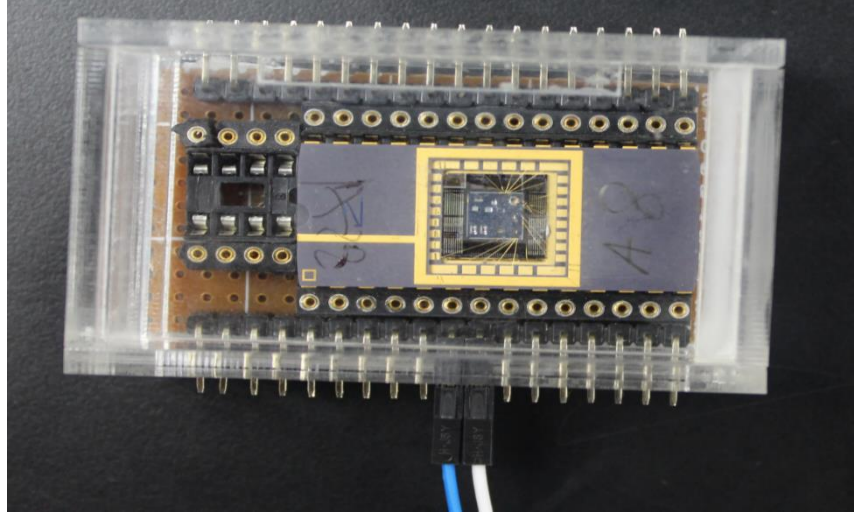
The Dual Inline Package (DIP) Placed into JIG
